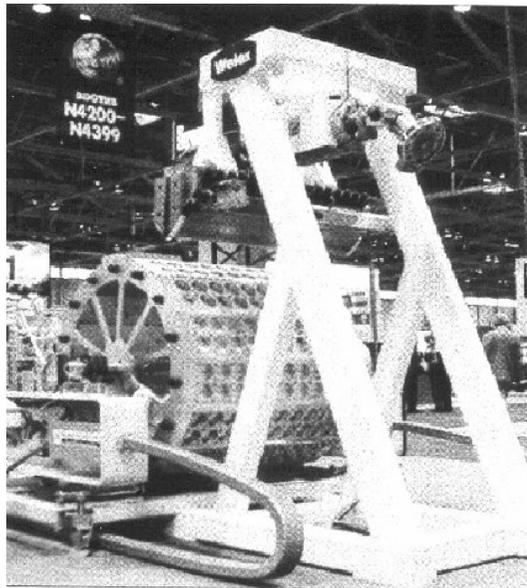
High-volume wheel thermoforming machine, showing the sheet extrusion die that feeds the polymer melt vertically onto the surface of the wheel. The product is vacuum formed as the wheel rotates in the clockwise direction. As the sheet containing the formed parts reaches the horizontal plane, it is stripped from the mold and fed to the trim die station.
